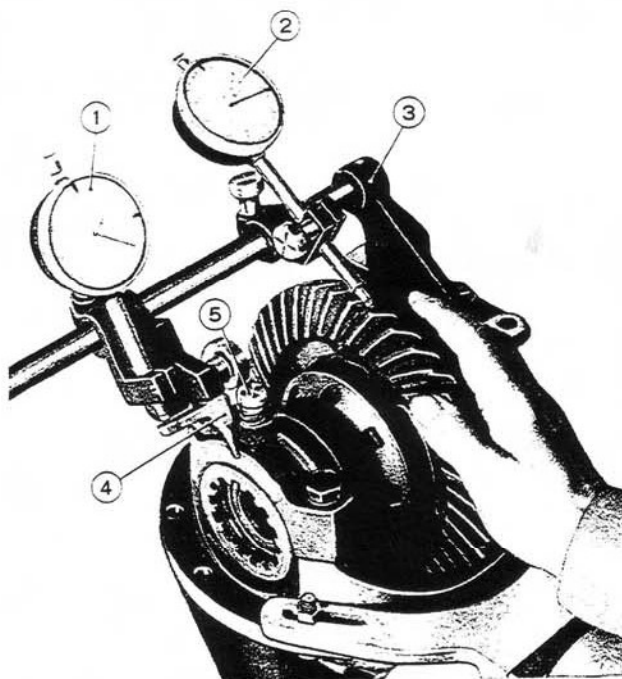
Checking backlash between pinion and ring gear. 1. Dial indicator for checking bearing pre-load - 2. Dial indicator for checking pinion-ring gear tooth backlash - 3. Holder for fixture A. 95688 - 4. Relay lever - 5. Fixture fixing stud.
